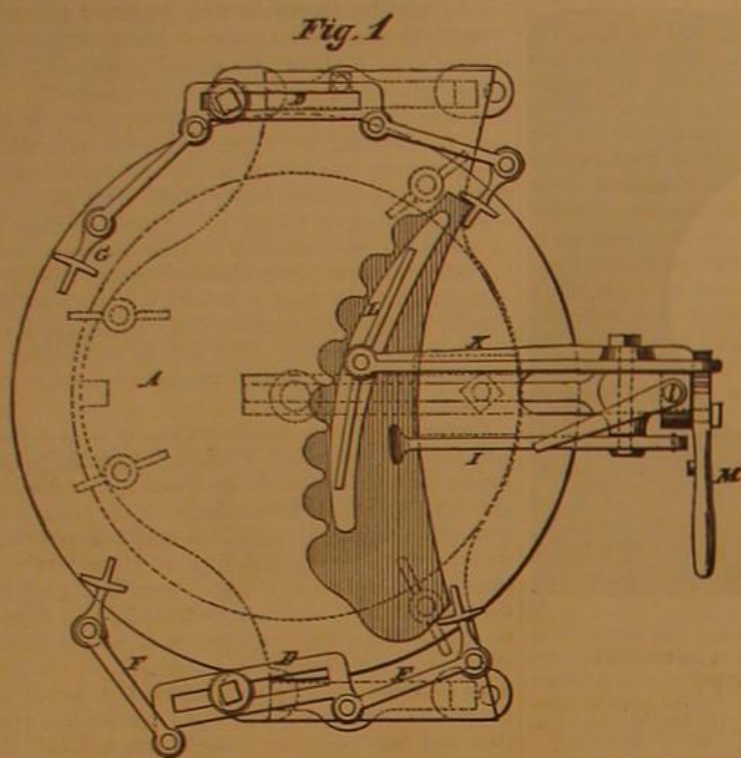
is a plain view of the machine, and Fig. 2 an elevation. A is a massive circular cutting block, in the lower
